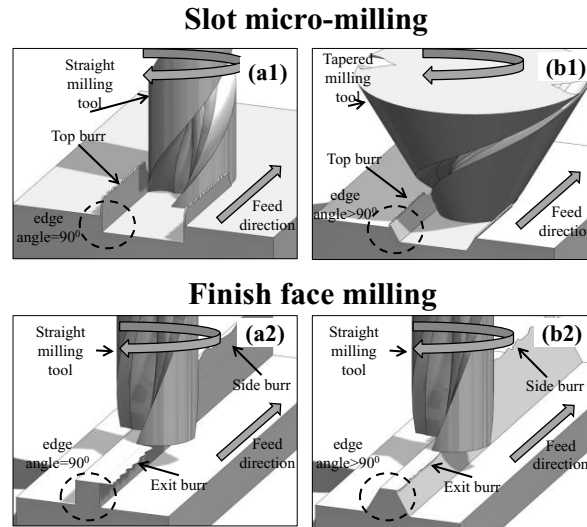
A tapered tool (b1 and b2) is expected to reduce top burrs formed and help in reducing the exit burrs formed in the subsequent finish face milling compared to a non-tapered tool (a1 and a2).
